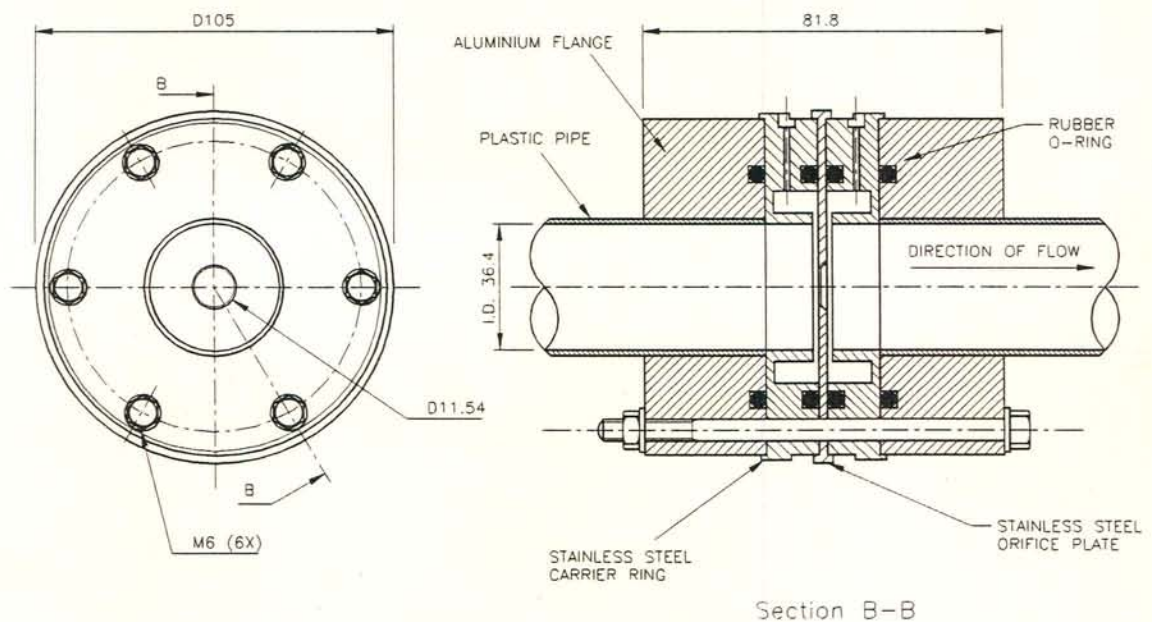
(d): Assembly drawing of orifice 3 installation.
